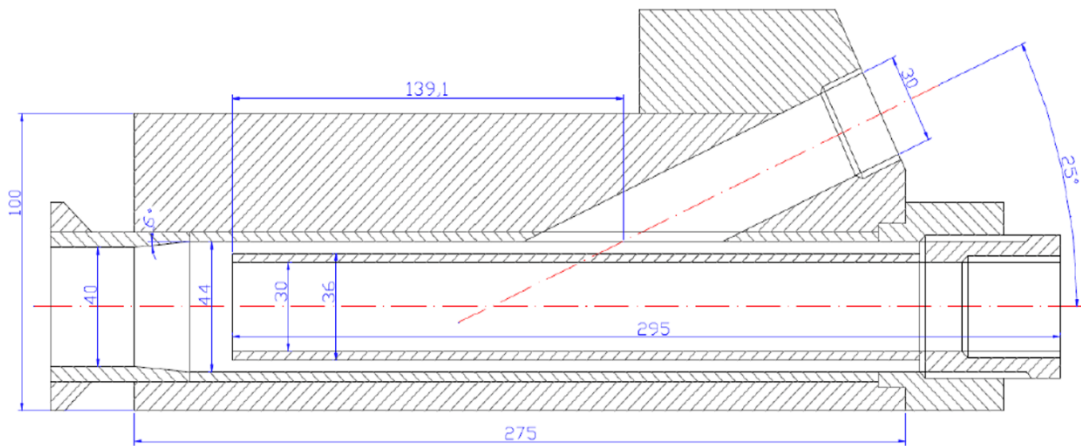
The geometry of the injector, sizes are in millimeters, sketch taken from [1]
